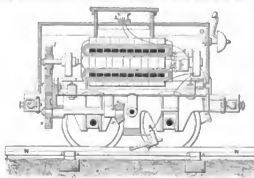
LONGITUDINAL SECTION OF MOTOR.
